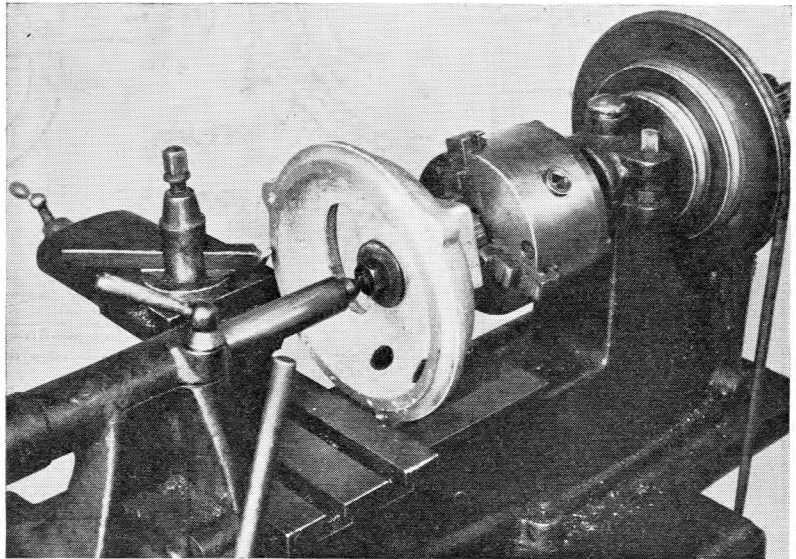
TURNING THE SPIGOT OF THE END COVER CASTING ON A SPECIAL ARBOR.
